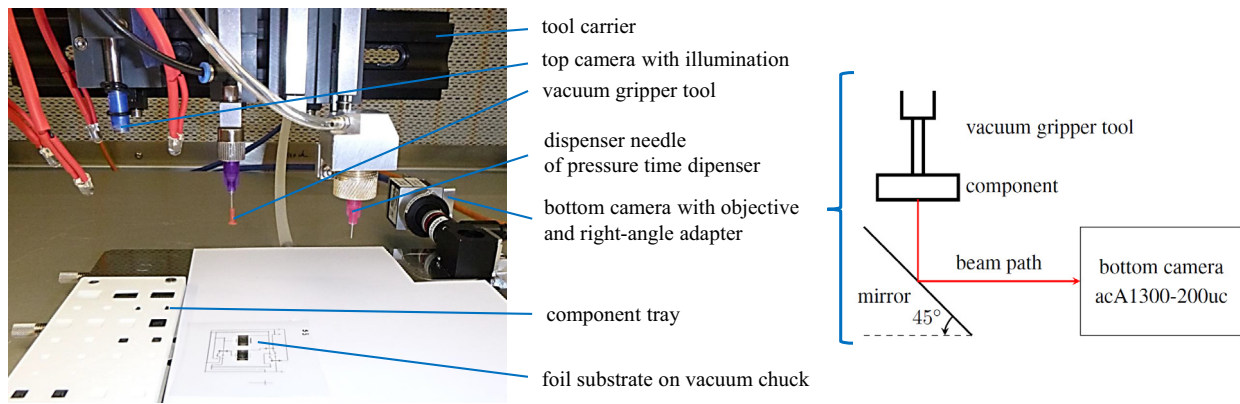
MIMOSE assembly machine and schematic optical path of the MIMOSE bottom camera.
